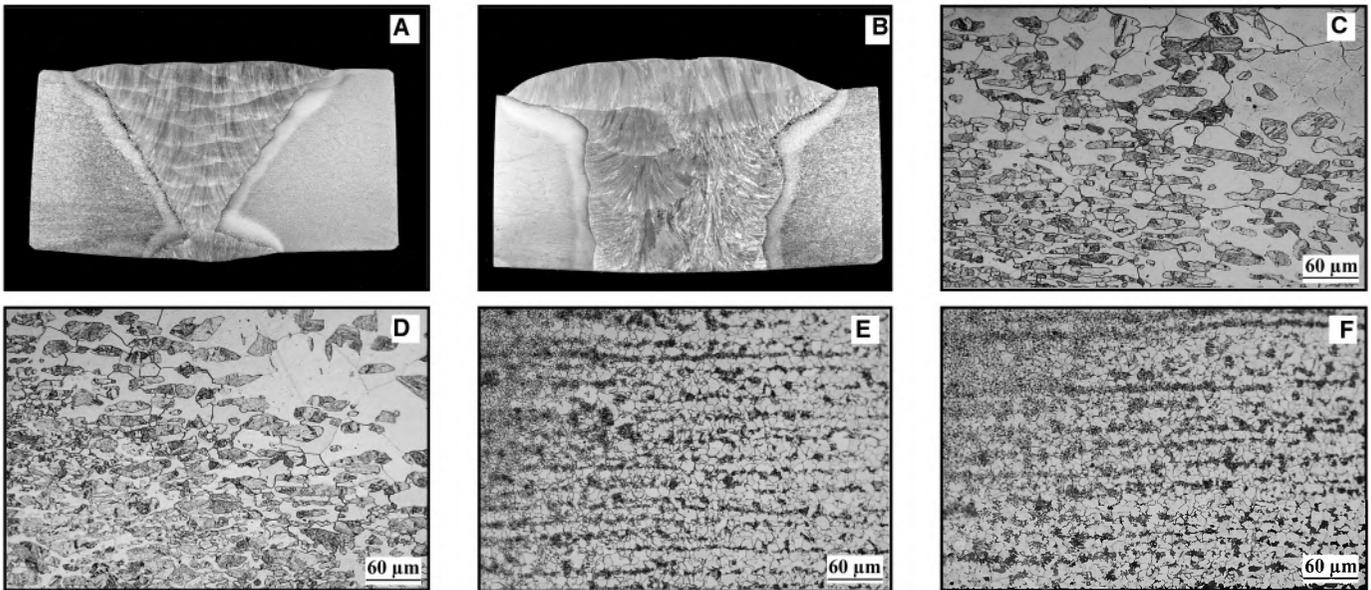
Macro sections. A — Shielded metal arc weld; B — submerged arc weld. micrographs; C — 12Cr HTHAZ, shielded metal arc weld; D — 12Cr HTHAZ, submerged arc weld; E — S355 HAZ, shielded metal arc weld; F — S355 HAZ, submerged arc weld.
